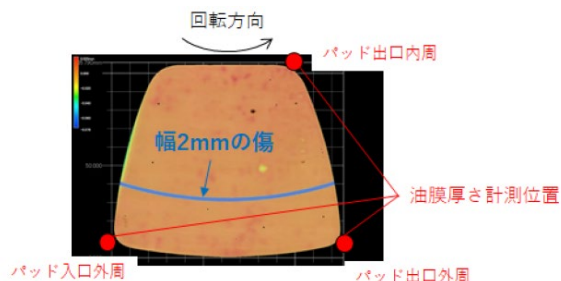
Test thrust bearing pad<sup>3)</sup>
